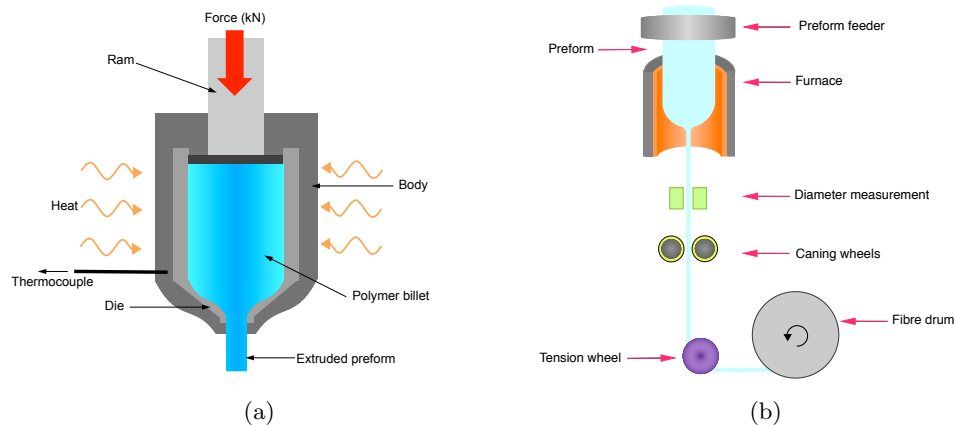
Schematics showing (a) the extrusion process and (b) the fibre drawing process
